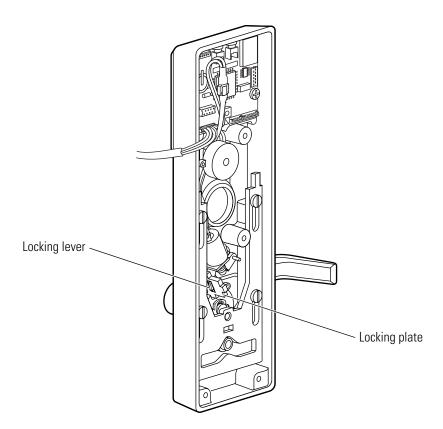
Removing and reinstalling the locking plate (B.A.S.I.S. escutcheon shown)
